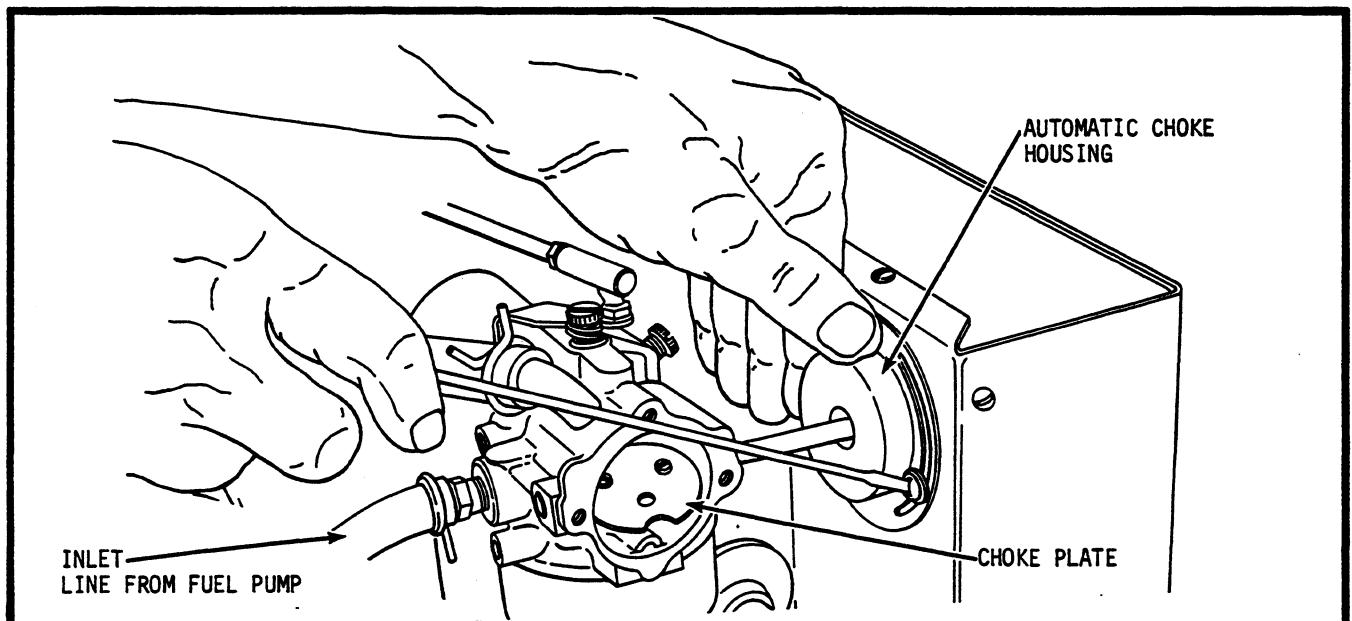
AUTOMATIC CHOKE ADJUSTMENT
